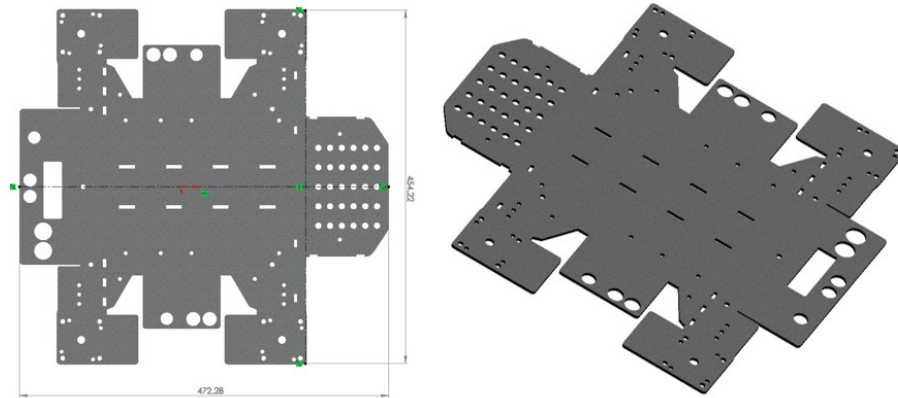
Monobase pattern, flattened to be cut with laser before brake press.
